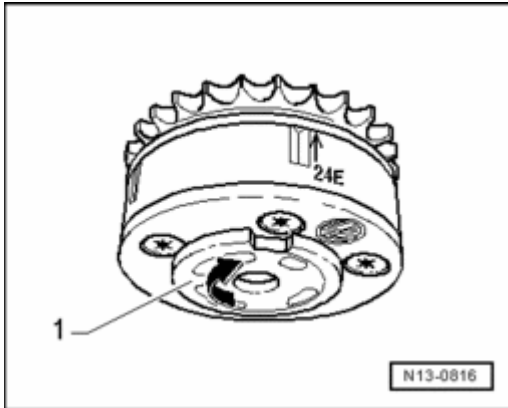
Turning Sensor Wheel On Intake Camshaft Adjuster Clockwise
